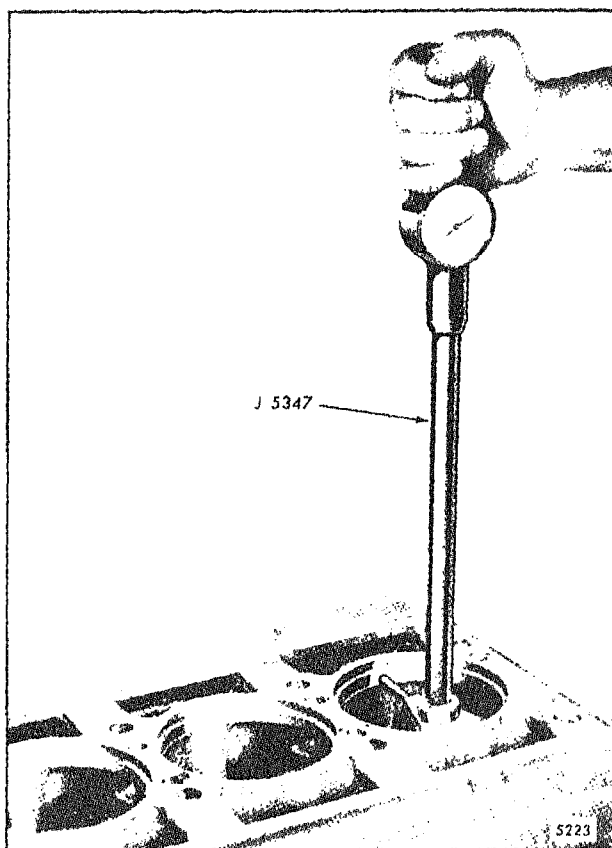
Checking Cylinder Block Bore with Tool J 5347
